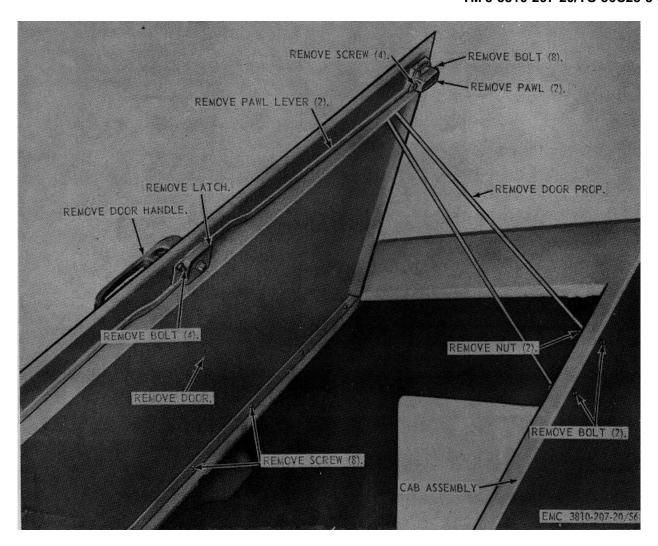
Top-front cab door, removal, disassembly, reassembly, and installation.
